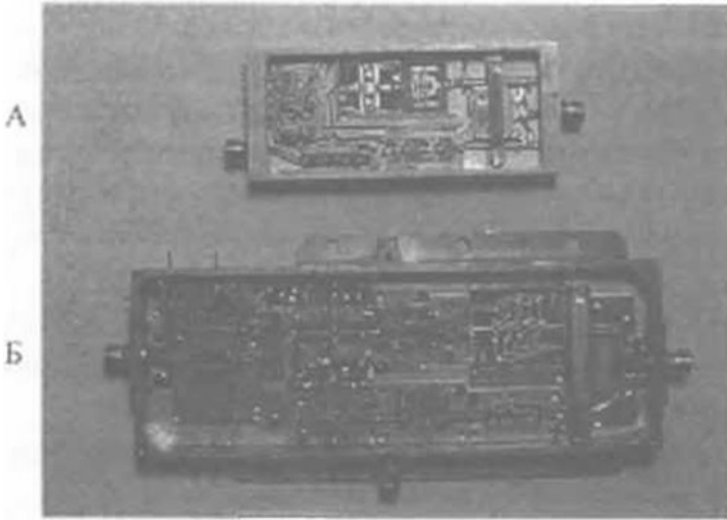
Appearance of the TRM engineering model (a) and TRM sample with specified dimensions (b) [2]
